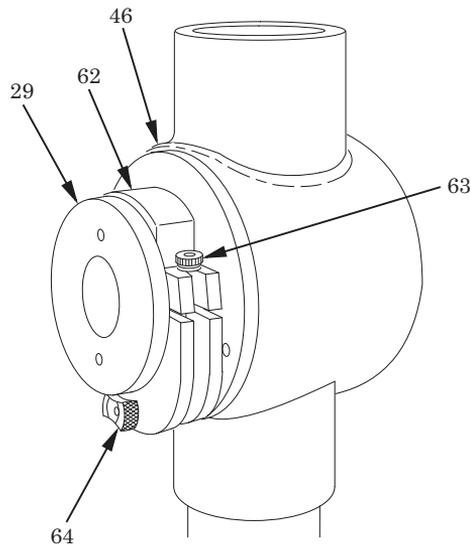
Drilling of Hole in Second Mechanical Drive Housing.
